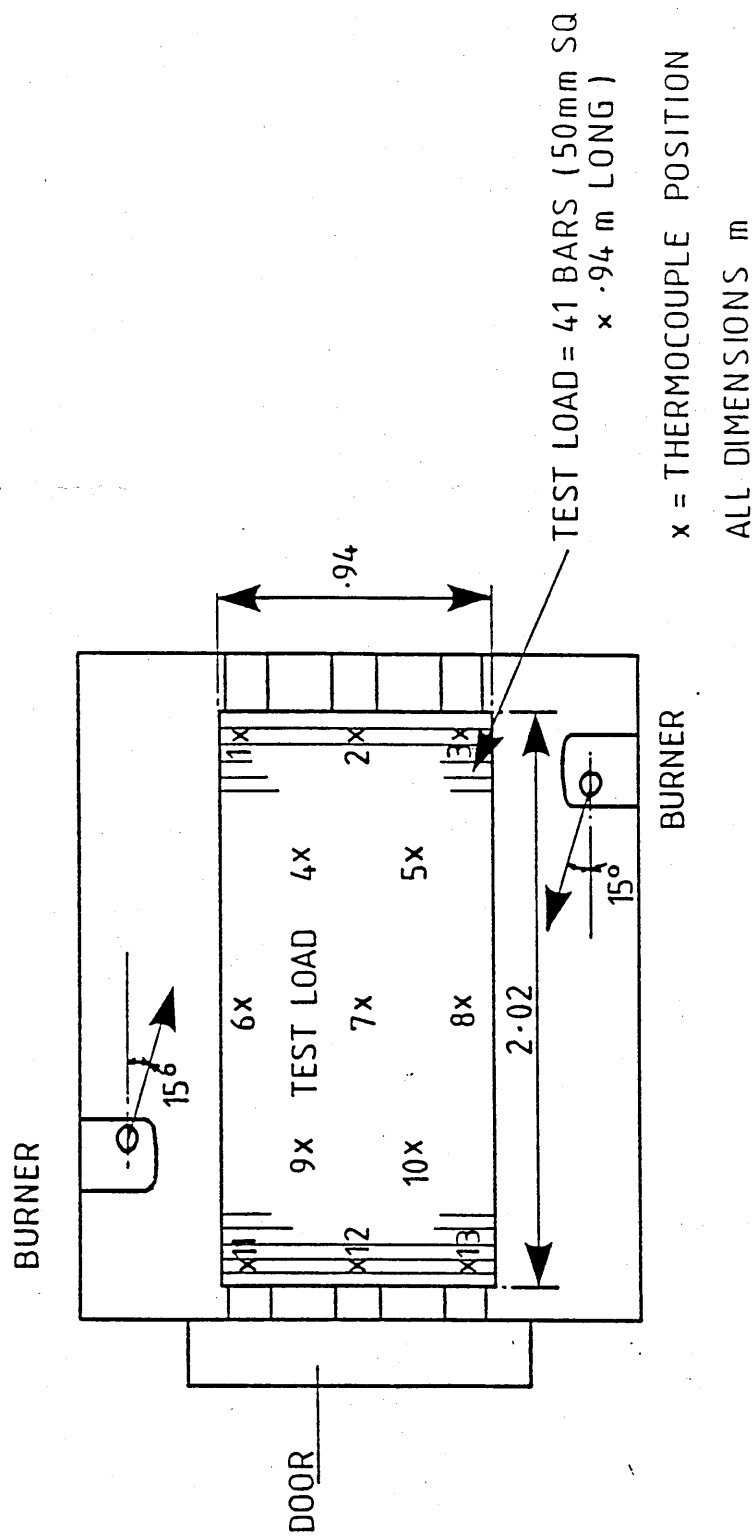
PLAN VIEW OF THE FURNACE AND THE TEST LOAD
